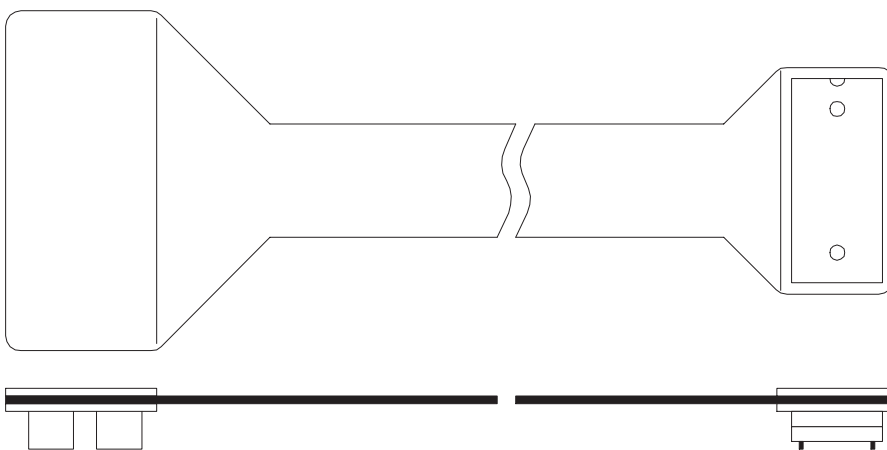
IC Socket-Type (QFP Type) Probe Cable
